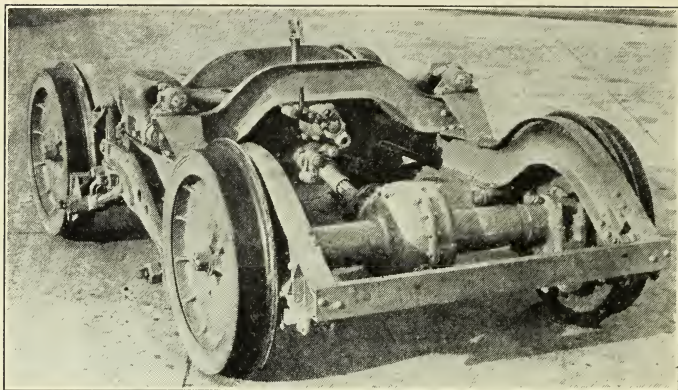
FRONT TRUCK OF THE CAR ILLUSTRATED IN FIG. 7 IN WHICH POWER IS DELIVERED TO BOTH AXLES BY AN AUXILIARY TRANSMISSION CONTAINED IN THE TRUCK BOLSTER
